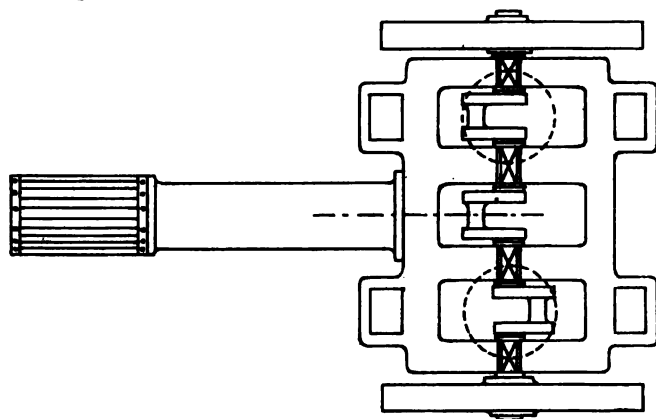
MACHINE WITH THREE CRANKS AND OUTSIDE FLY-WHEELS.
